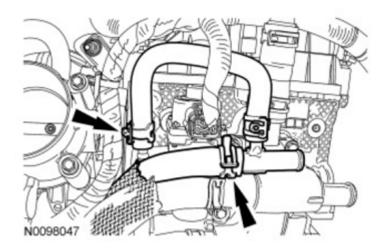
Locating EGR Coolant Hose And Auxiliary Coolant Pump Hose Courtesy of FORD MOTOR CO.
